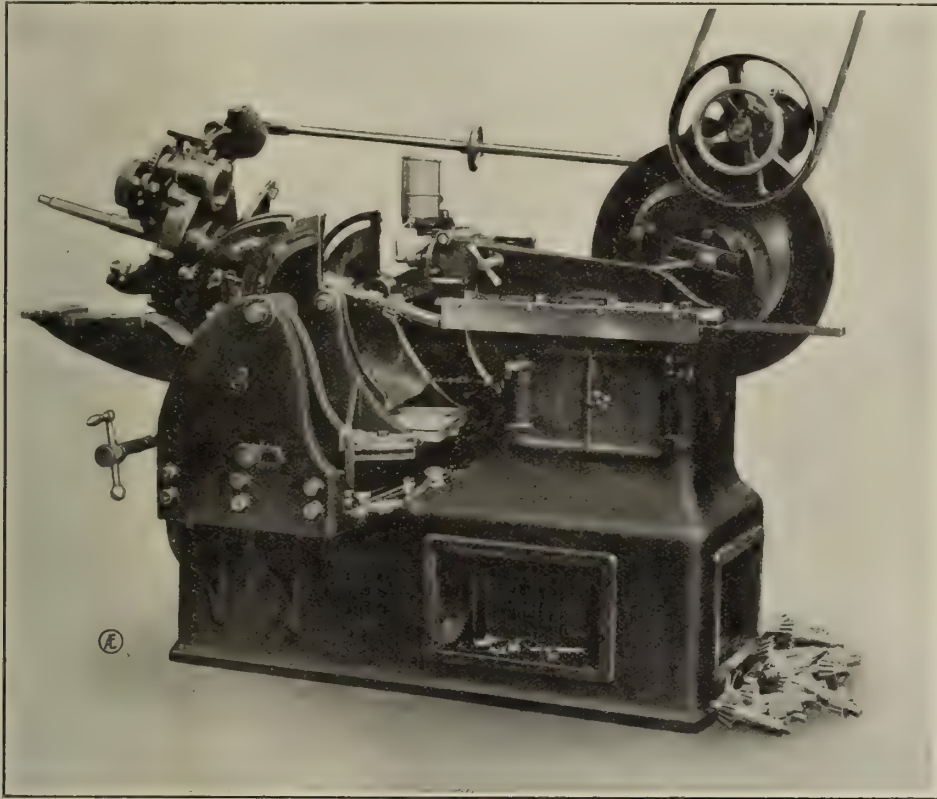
Fig. I. Reinecker Full Automatic Bevel Gear Cutter.
